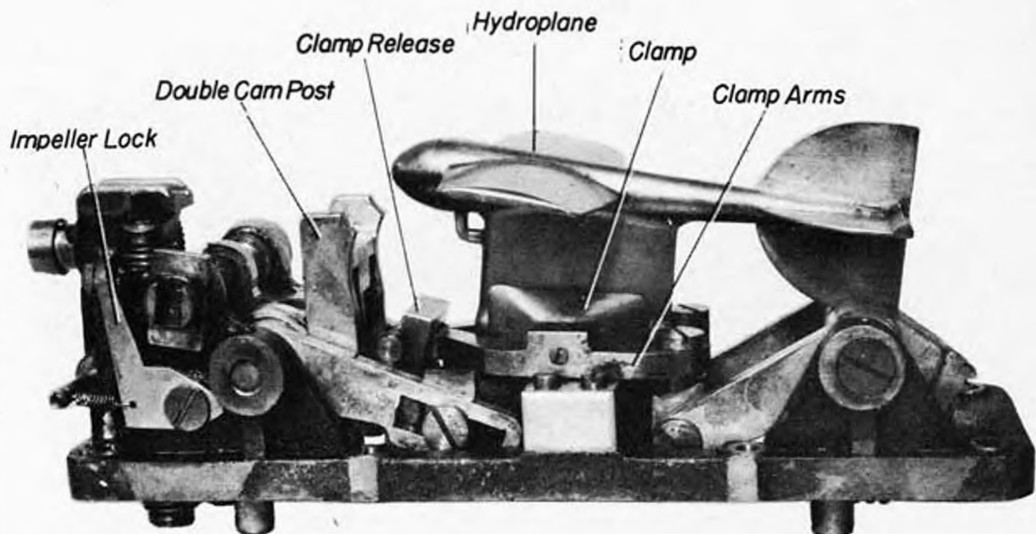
Hydroplane Elevating and Releasing Assembly, Before Safety Run
